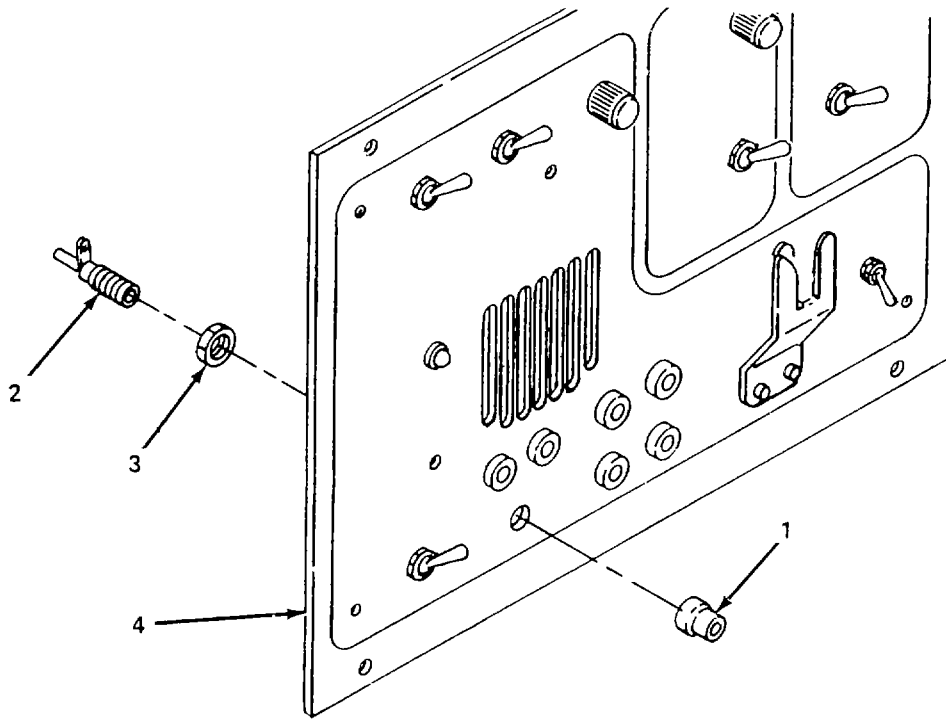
Front Panel Chassis Assembly Banana Jack, Replace.
